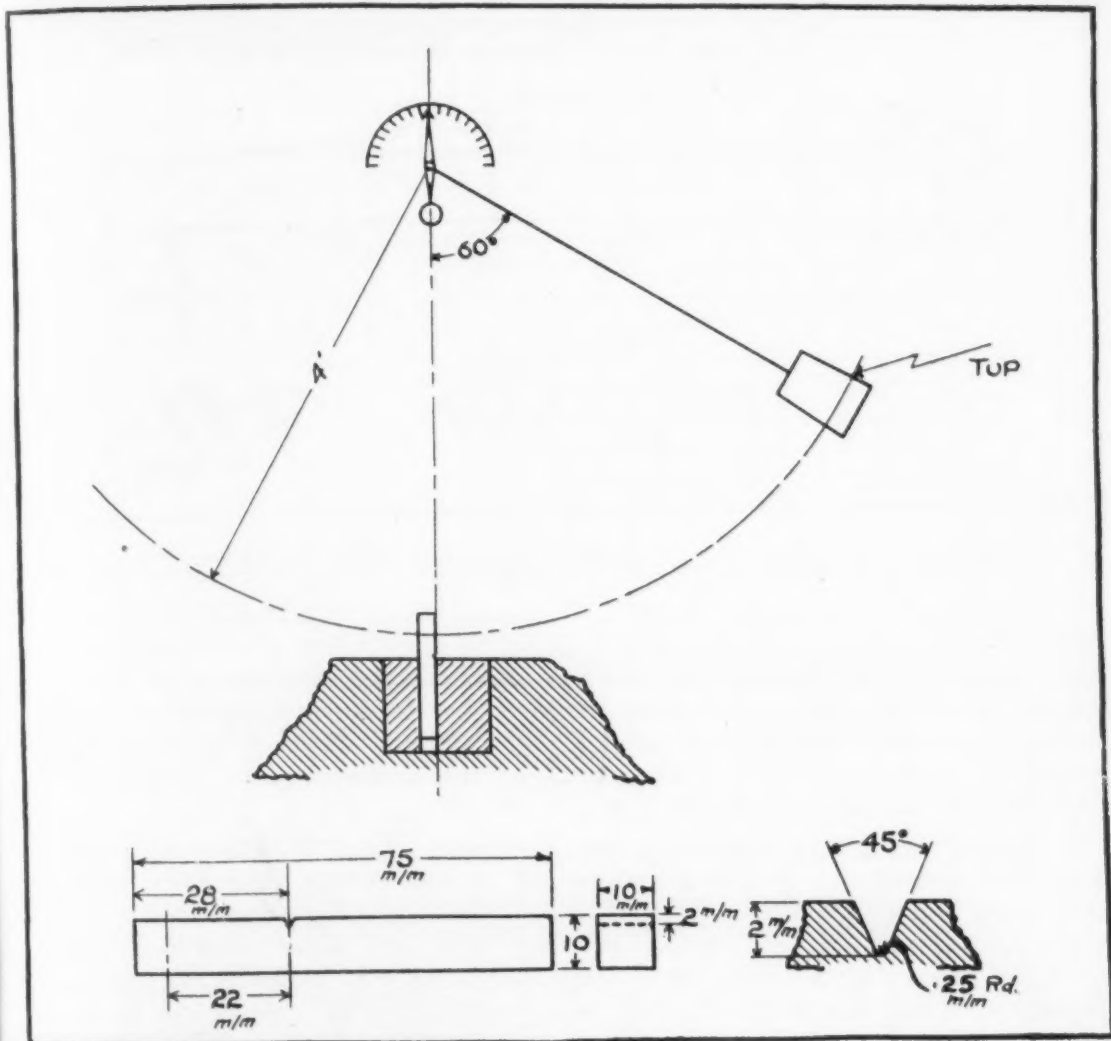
Arrangement of Izod impact testing machine with sketch of test specimen shown below
